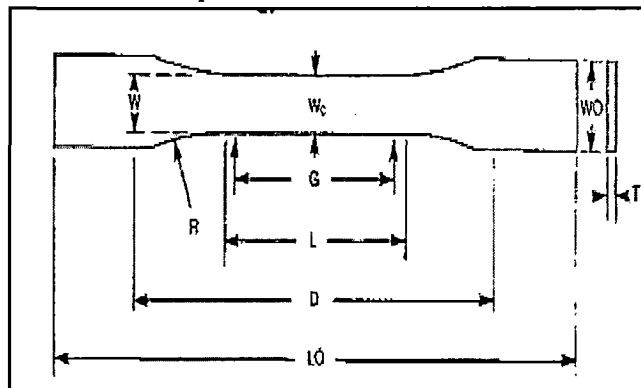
Drawing of ASTM D 638-08 tensile test specimen
